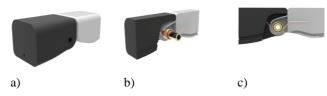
Final concept of hinge joint design for the closing movement of fingers: a) External appearance; b) Brass tube and spring; c) Front view of the joint.
